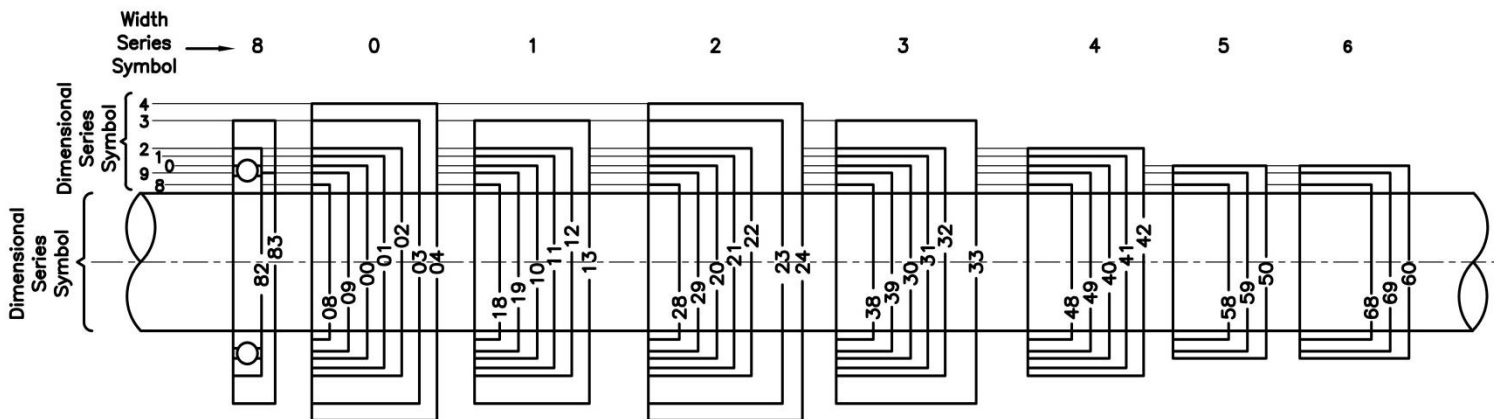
Cross-sectional profiles of radial bearings by dimensional series
